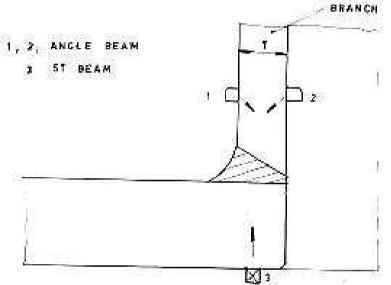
SCANNING DIRECTIONS FULL PENETRATION CORNER WELDS (SET-ON)
